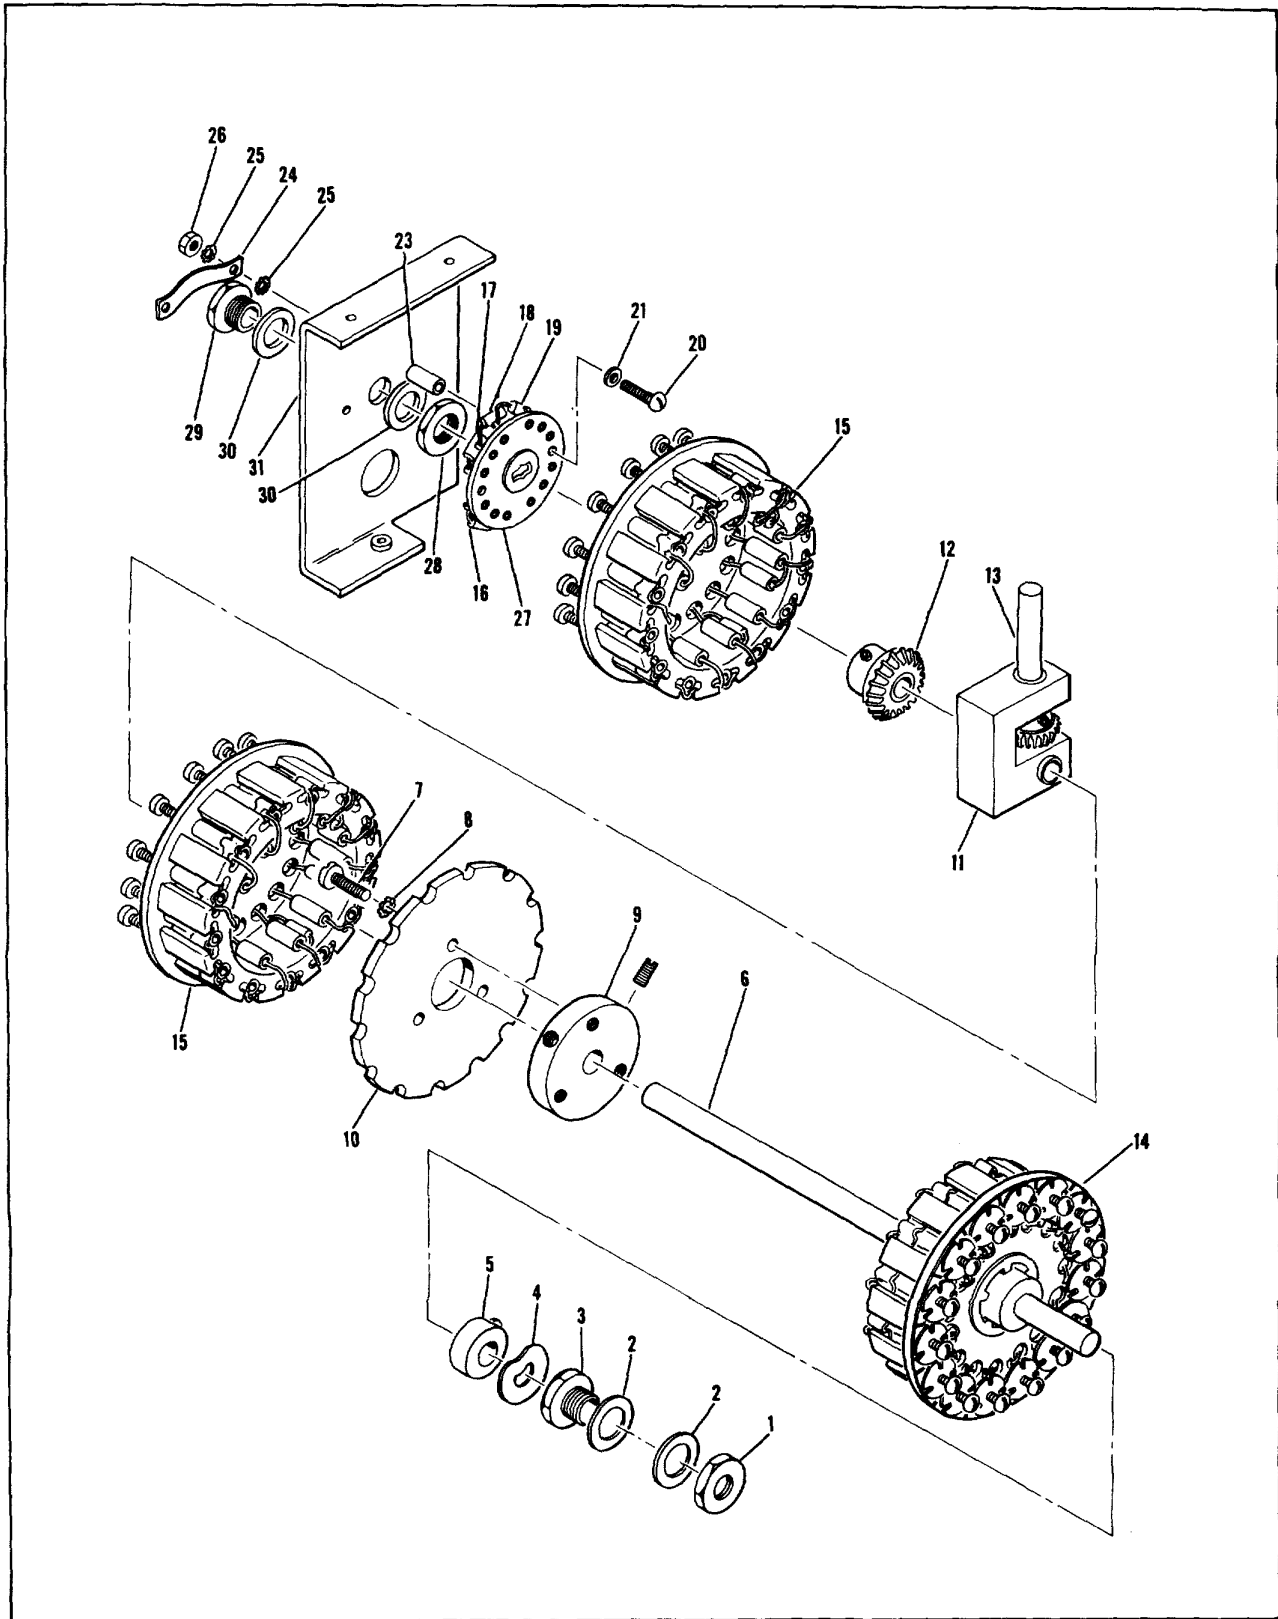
Exploded View of MIXING FREQUENCY MC Switch Showing Replacement of Sections Containing Capacitors, CV-394/USA-5
